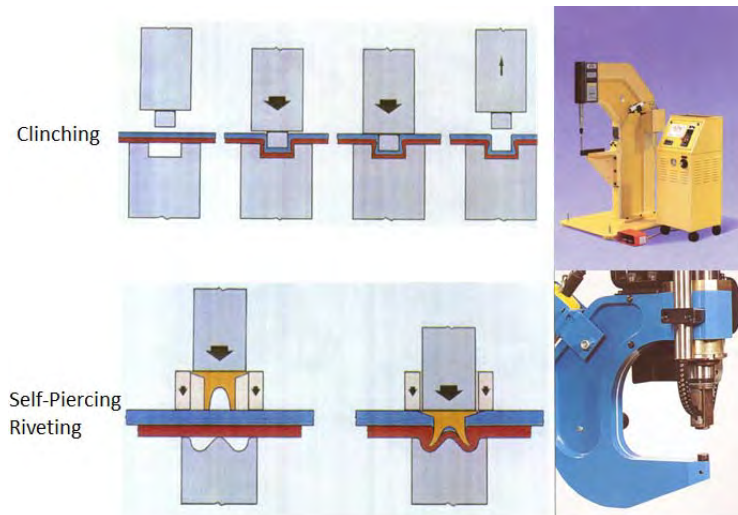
P-1: Process steps and equipment for mechanical joining in automotive industries.
